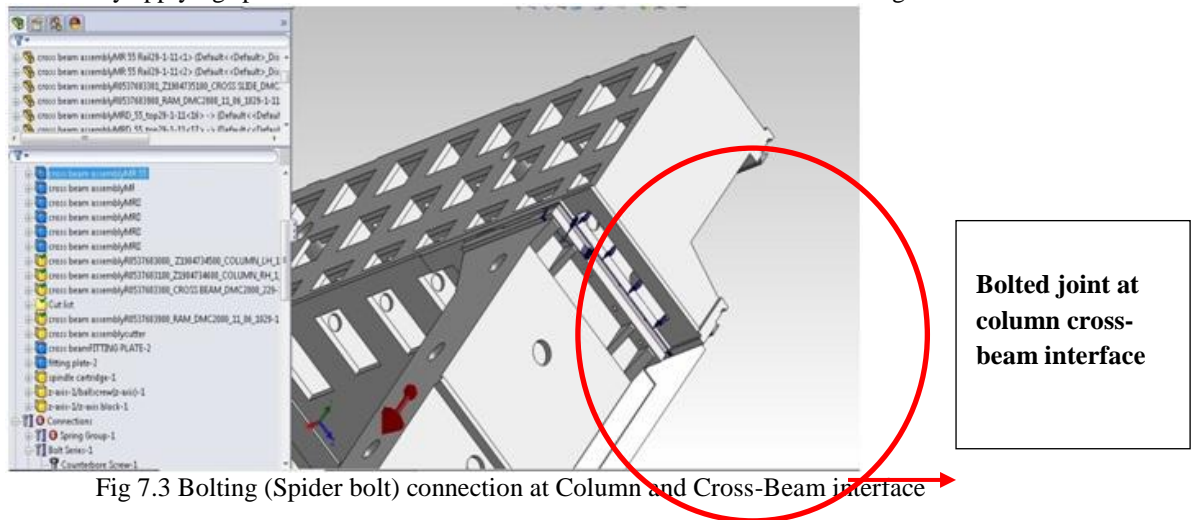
Bolting (Spider bolt) connection at Column and Cross-Beam interface
